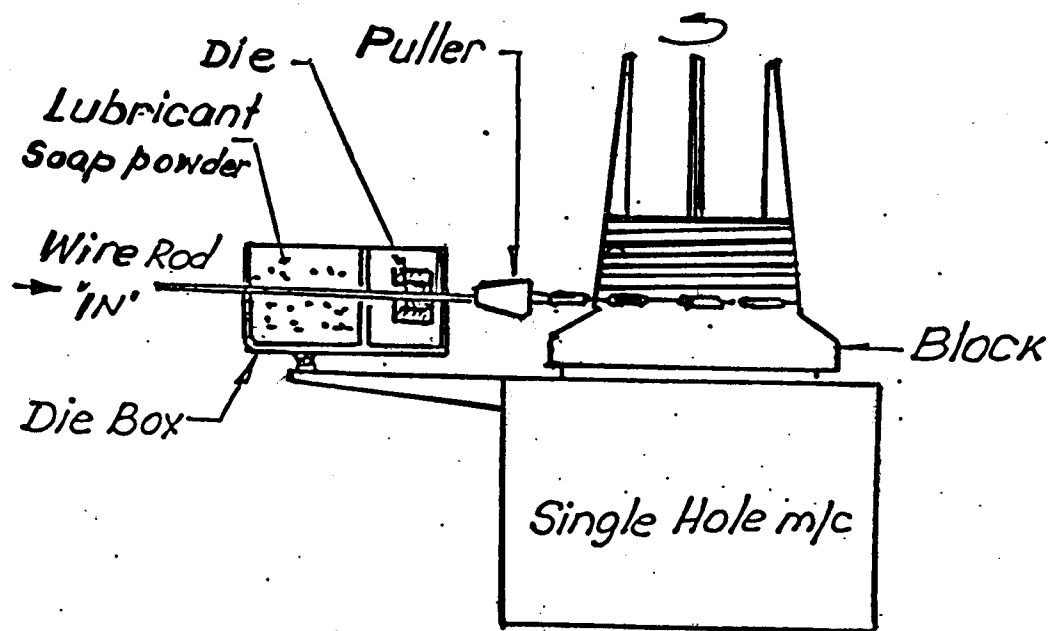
TYPICAL SINGLE HOLE WIRE DRAWING PROCESS
